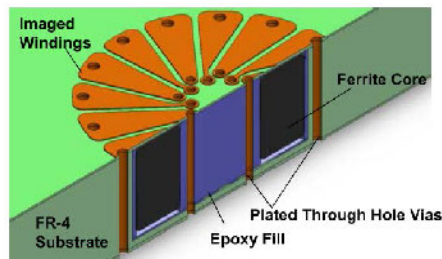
Drawing of an embedded magnetic device. The magnetic core is embedded inside the PCB. The winding is manufactured around the core using PCB traces and vias [3].
